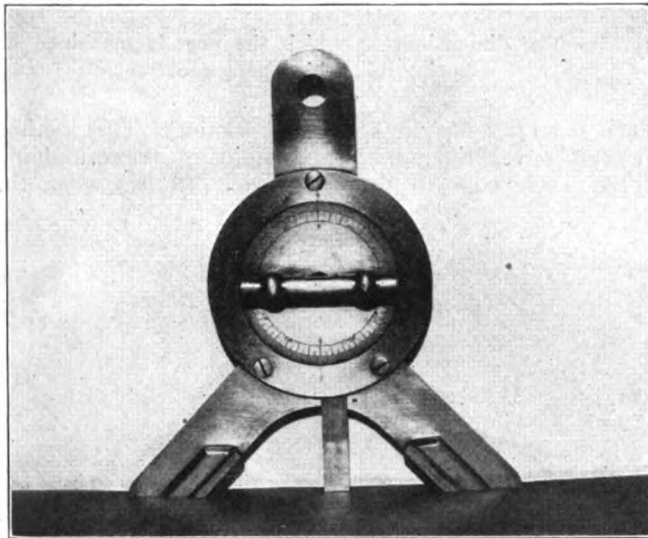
Gage used for locating eccentric keyways on new axles for Stevenson valve gear
